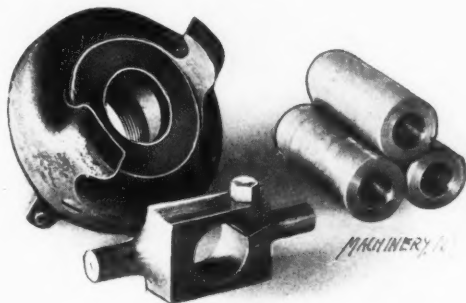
Special Holder and Two-tailed Driver for Boring in the Turret Lathe.
